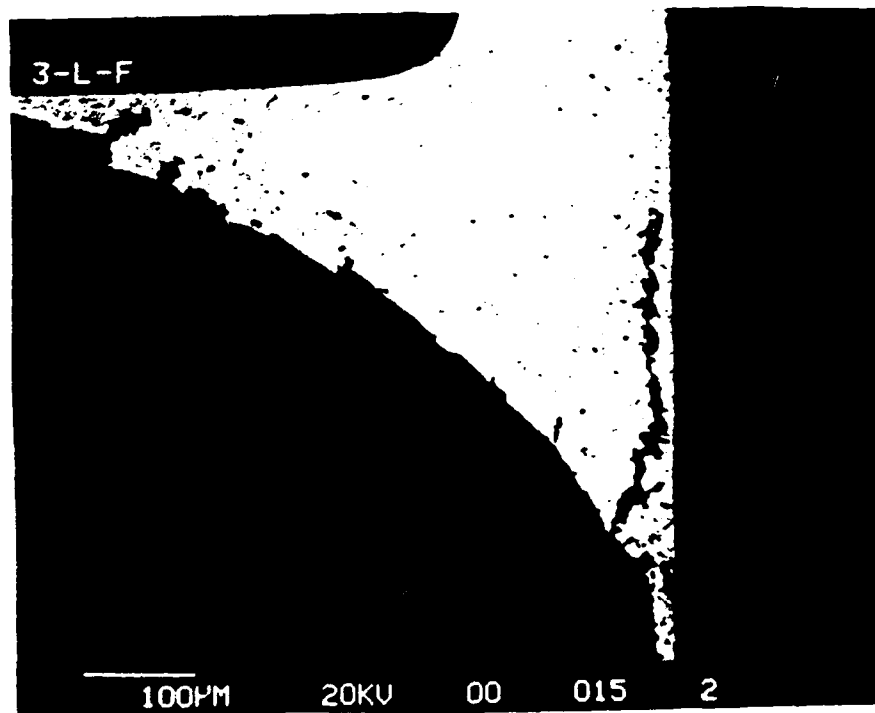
COARSENING AND RESULTANT CRACKING IN A THROUGH HOLE SOLDER JOINT SUBJECTED TO STRAIN. SIMILAR FAILURE MODE AS A SMD.
